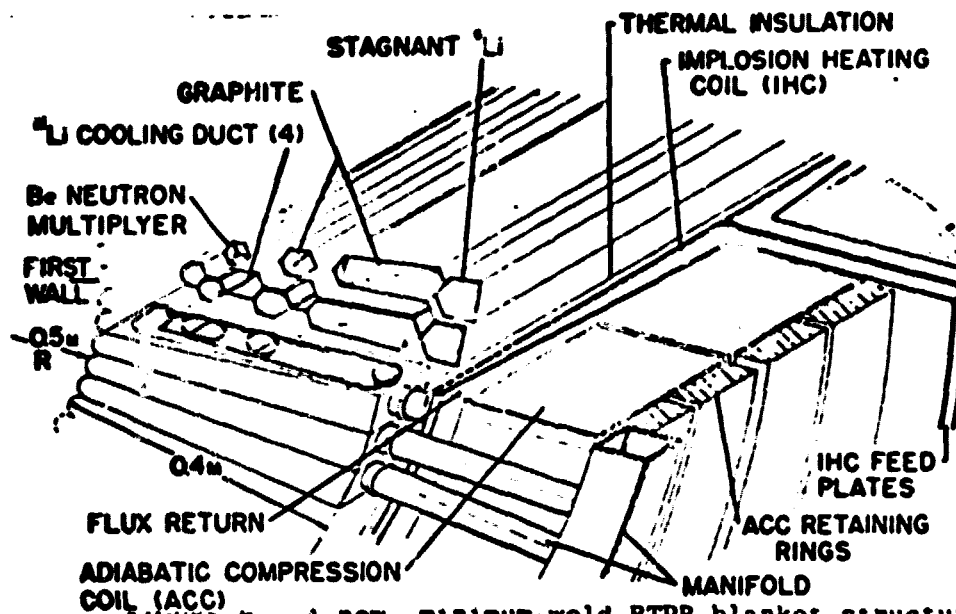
A new, minimum-weld RTPR blanket structure.
